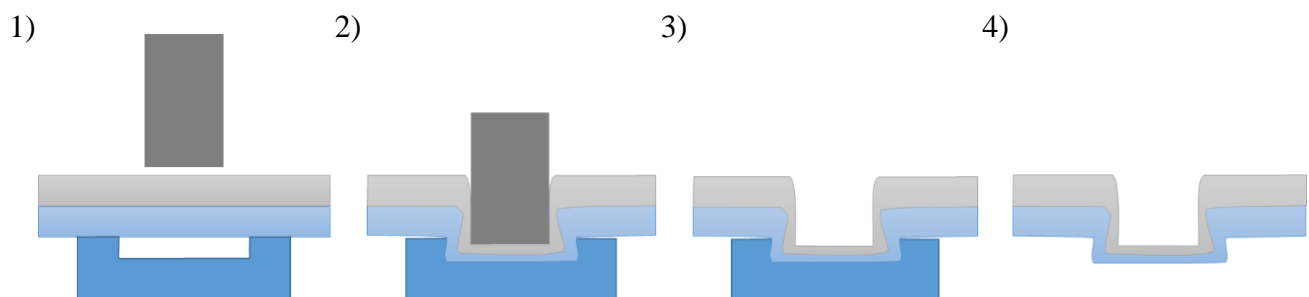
Cross-sectional view of clinching tool setup which involves four Stages (1-4) from assembly to produce a joint.
